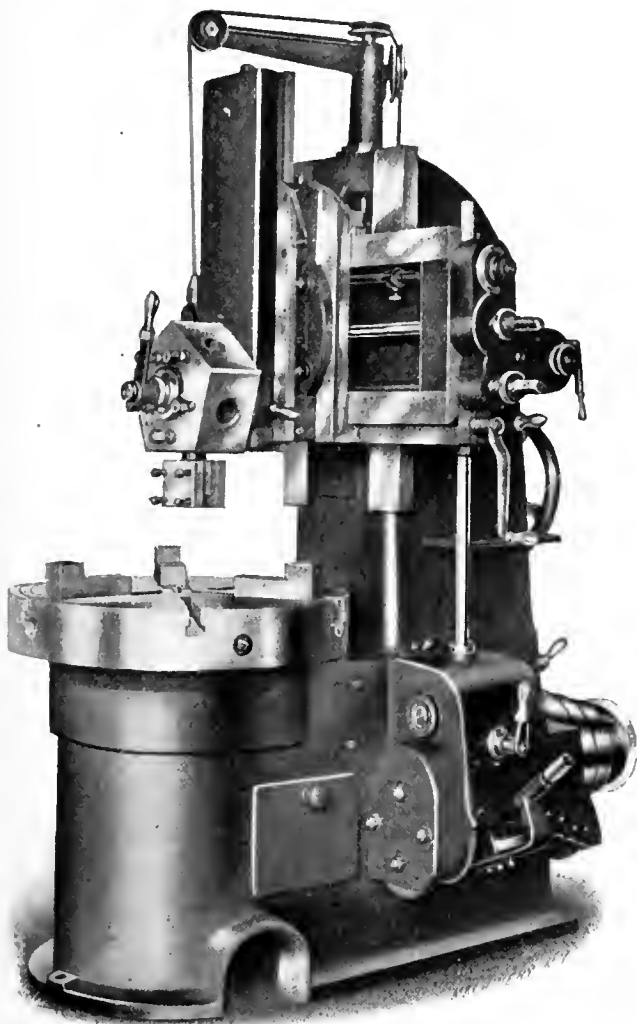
The Flather 30-inch Vertical Turret Machine.
